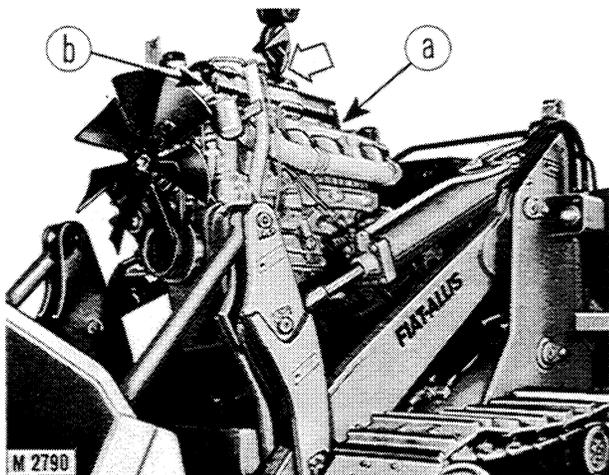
Removal (installation) of engine-converter assembly using lifting hook 75295500.
